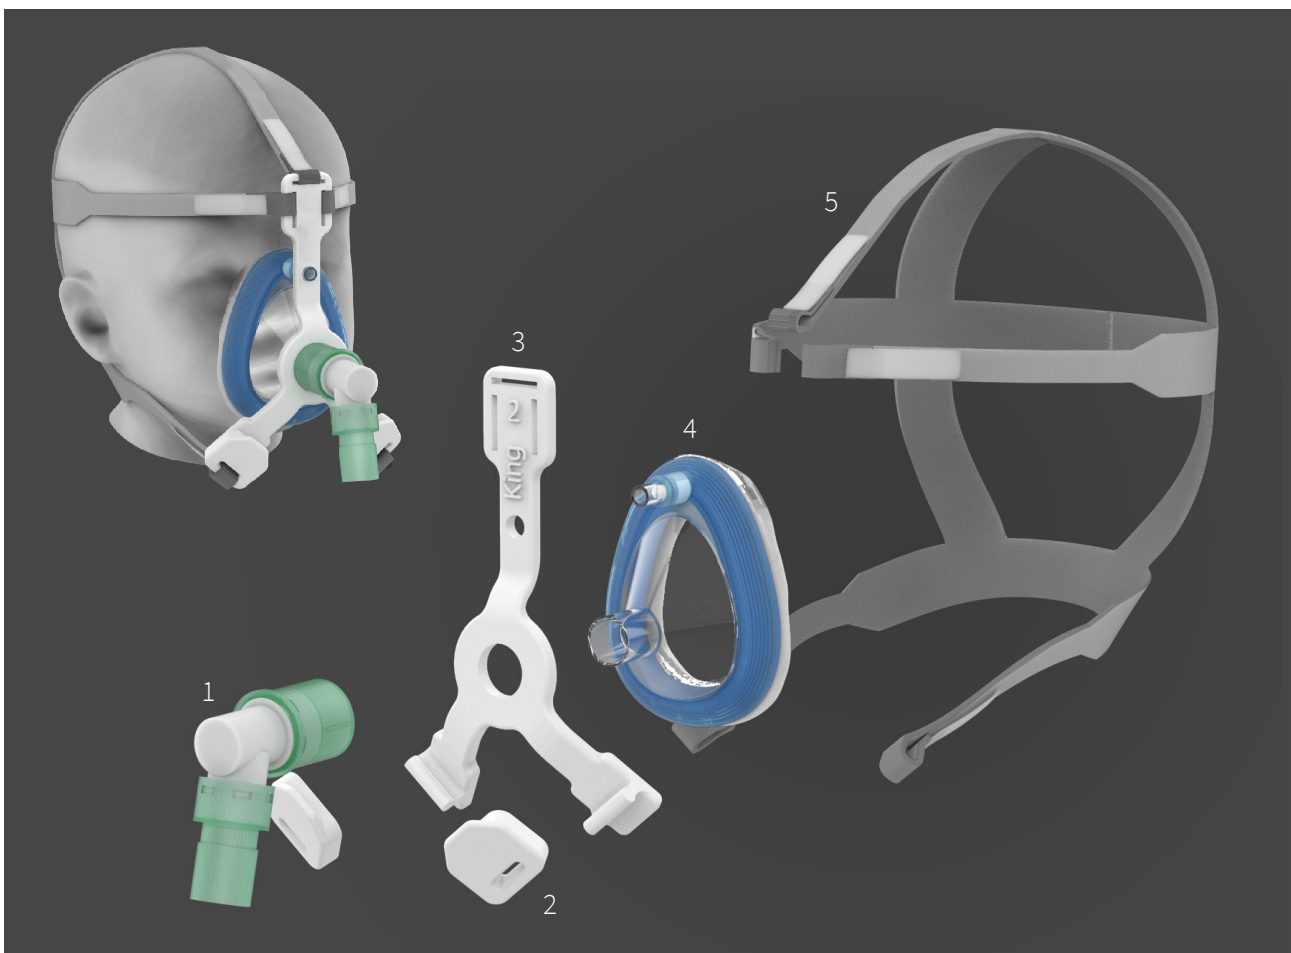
Parts of the Quick Curable Mask, (1) headgear, (2) anesthesia mask (3) holder, and (4) swivel.
